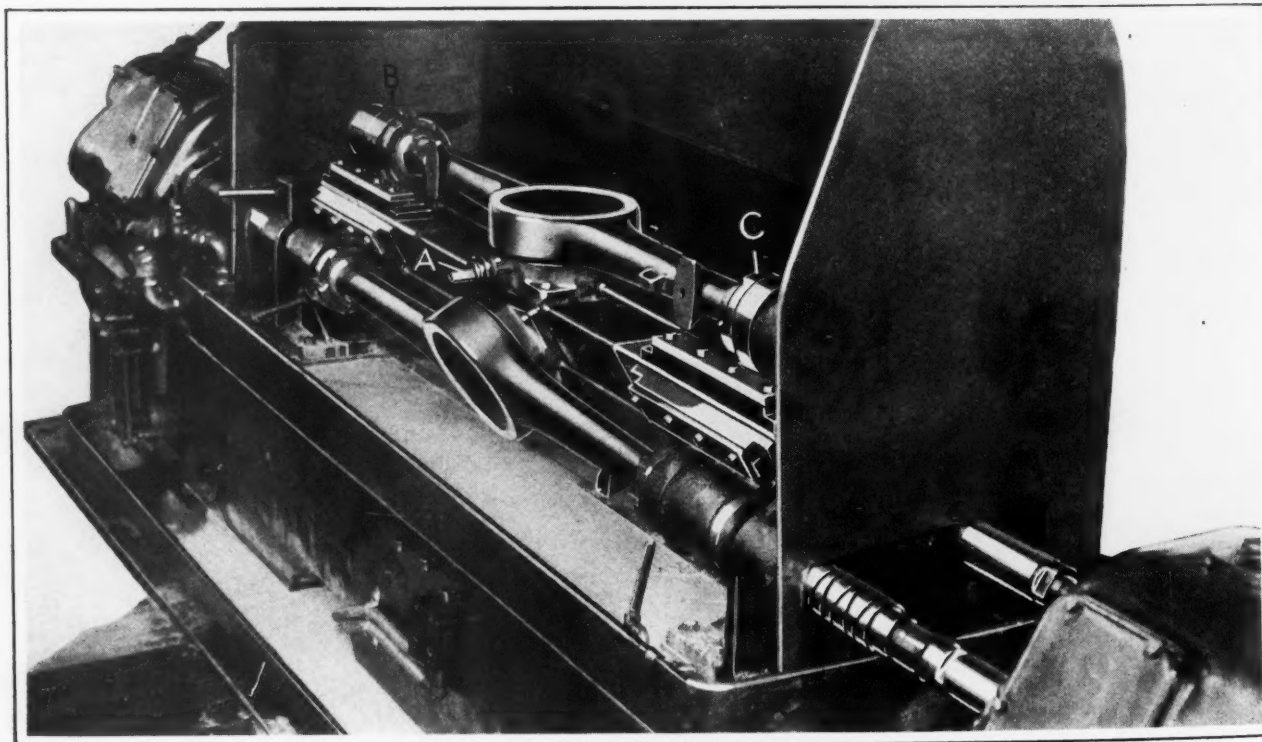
Three-station Fixture in which Housings can be Loaded while Boring and Reaming Operations are in Progress
